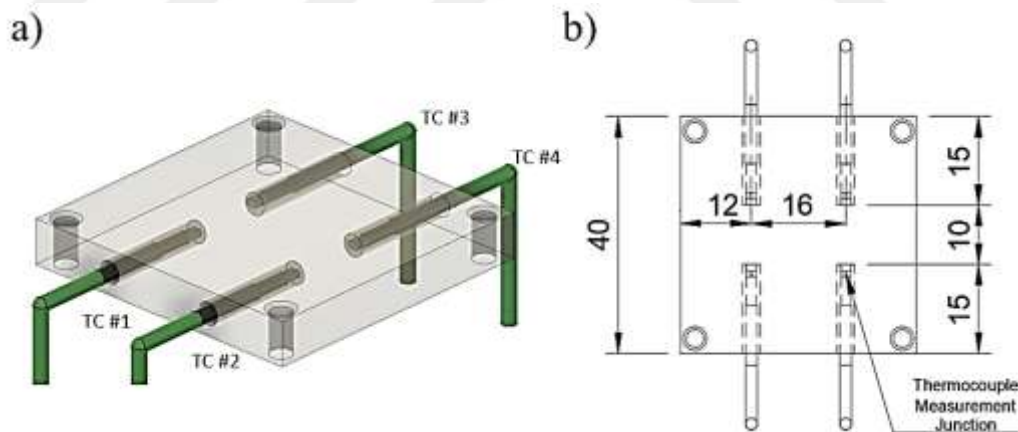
CAD drawing of slots in the brass plate to place the thermocouples a) CAD view and b) drawing with dimensions.
